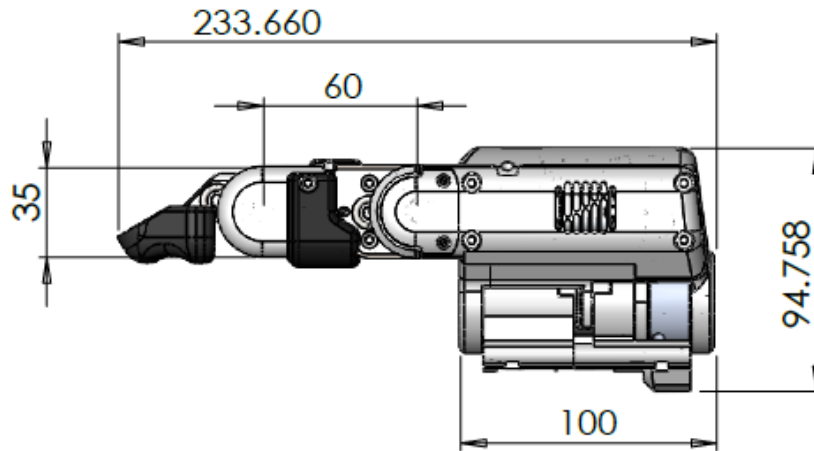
CAD model side view of one SSGS manipulator, with dimensions.
